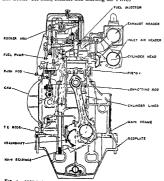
SECTIONAL VIEW OF A MODERN MEDIUM SPEED FOUR STROKE CYCLE DIESEL ENGINE
